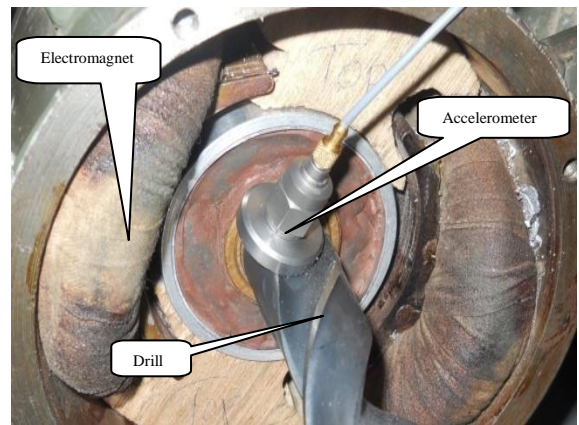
(c): Photograph for showing arrangement of drill, Electromagnet and accelerometer.
